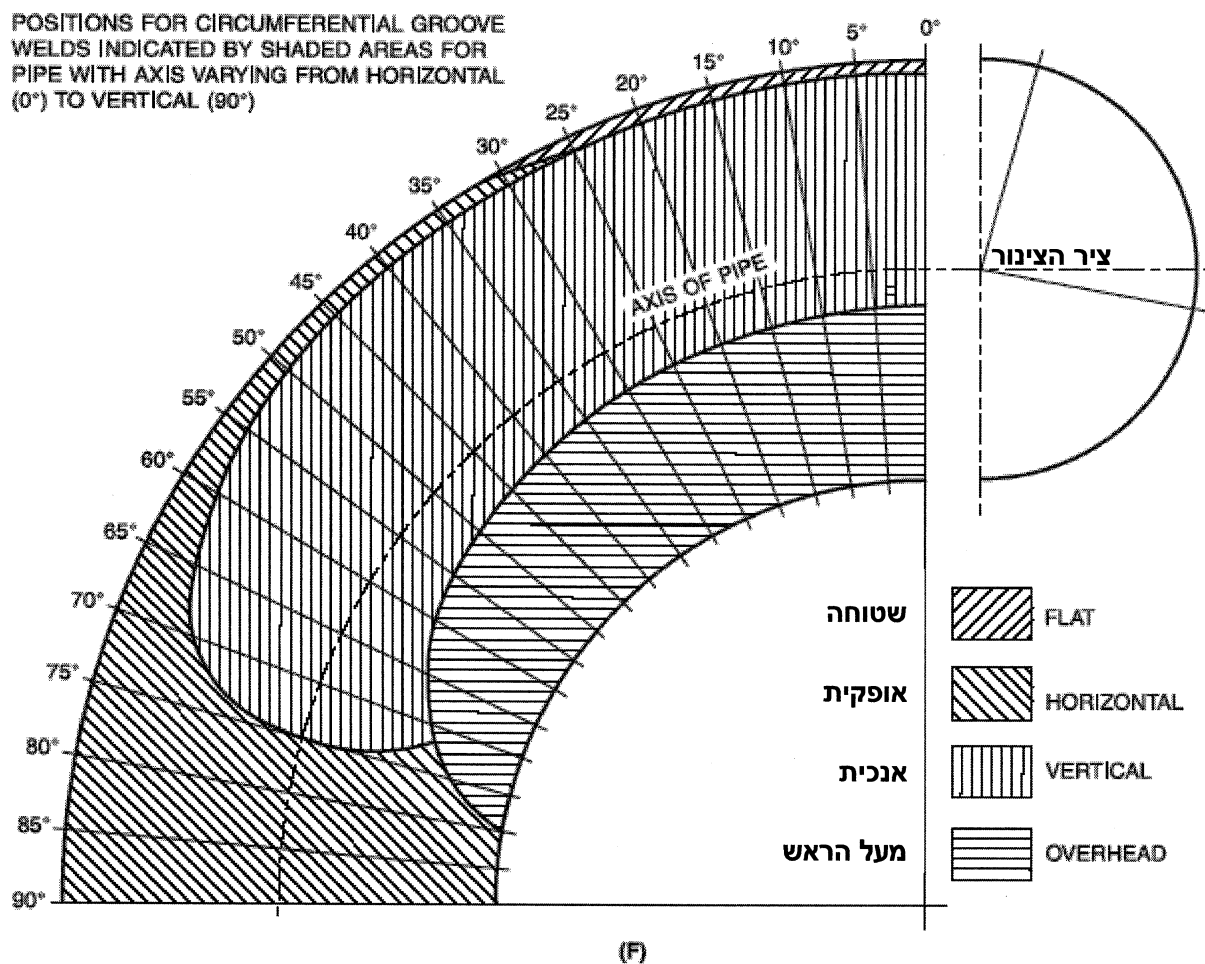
C—Welding Position Diagram for Groove Welds in Pipe
